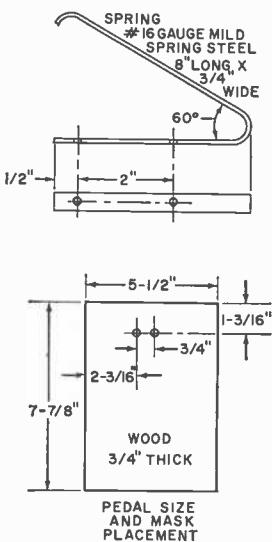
If you want to fabricate chassis similar to the one shown in the photos, follow construction details shown here.
